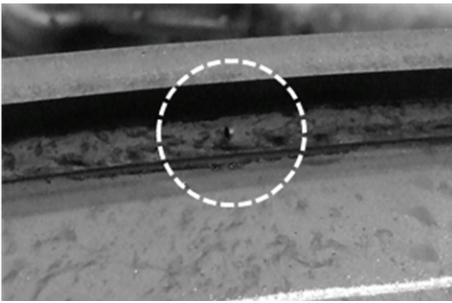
Photo of blow hole after the 1-pass arc welding
